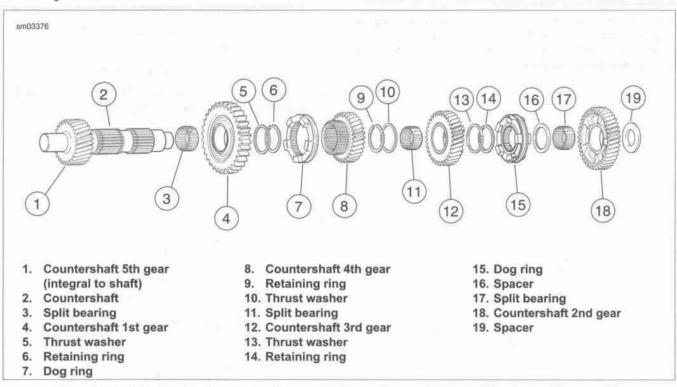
Transmission Countershaft Assembly Once Removed from Left Crankcase/Disassembly
